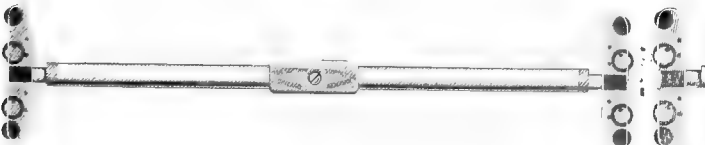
Ring Fixtures for Open Grooves, 3/8 in. by 3/8 in., Without Pinch Handles.
